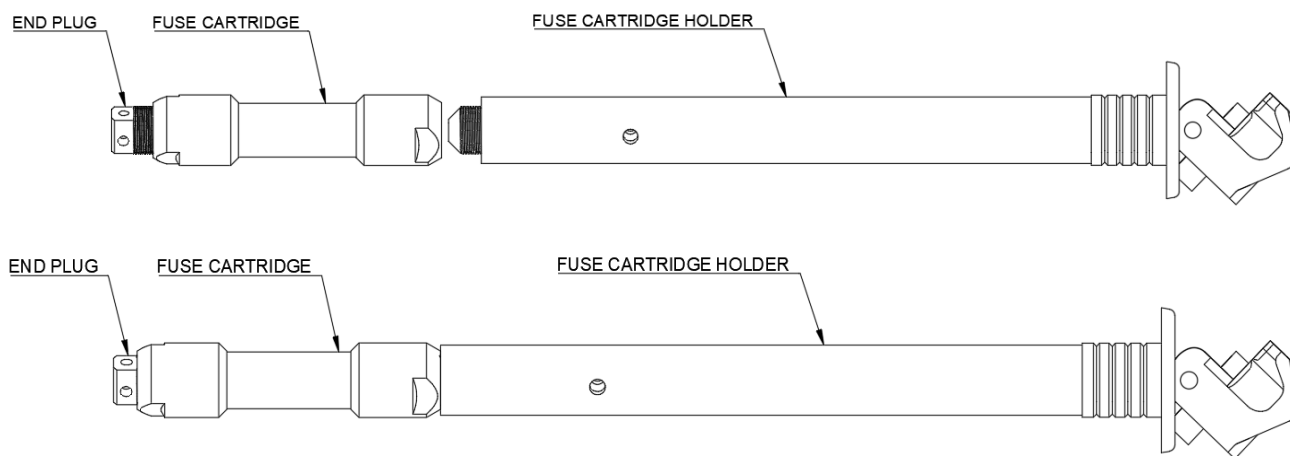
Installation view of the Cover Mounted Bayonet Fuse Holder)
